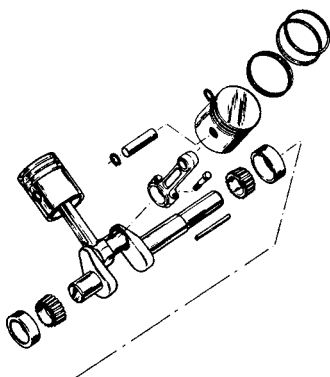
Blow-up of the working parts of a compressor showing tapered roller main bearings and insert-type connecting rod bearings.
